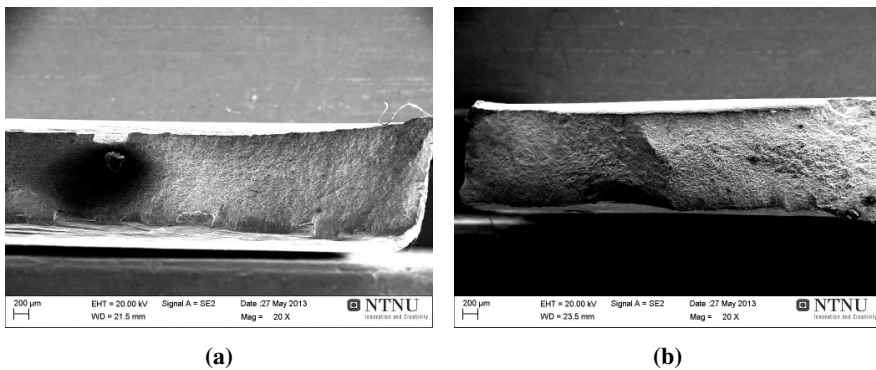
Additional fracture surface overview of the FZ tensile specimens representing the (a) transverse and (b) longitudinal direction.
